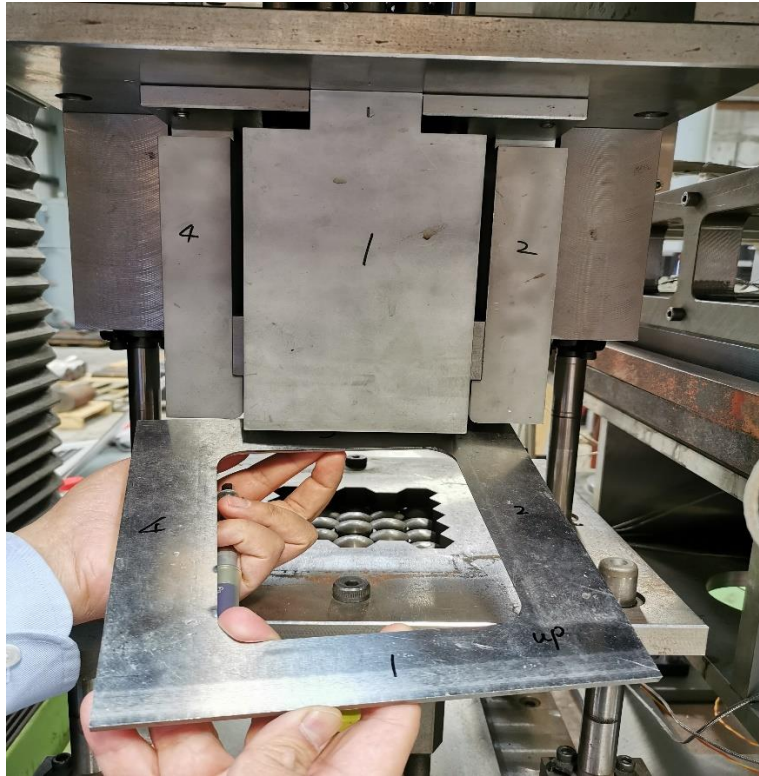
Illustration of fixing blank holder to the upper blocks of forming tool
